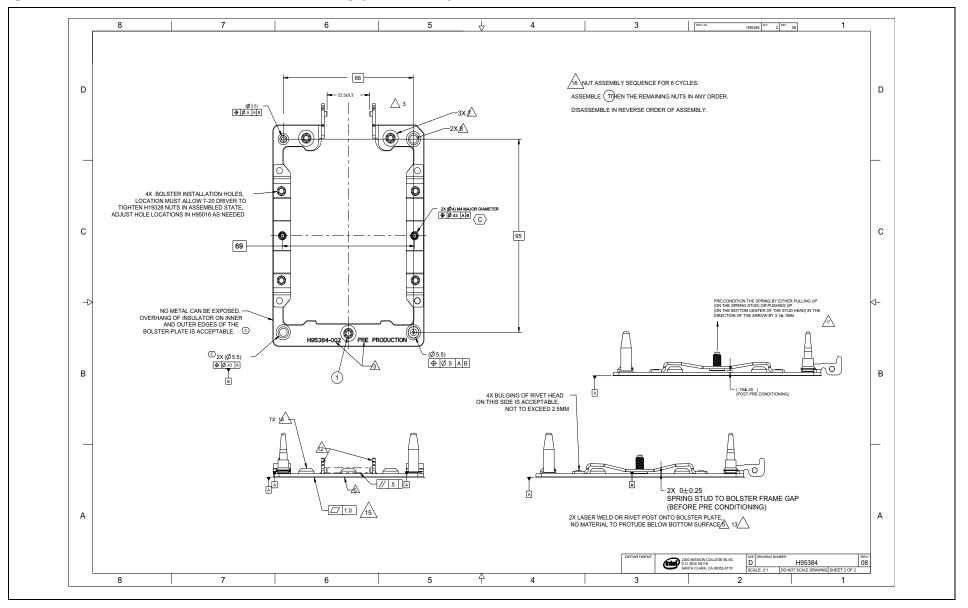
Narrow Bolster Plate Assembly (Sheet 1 of 2)
